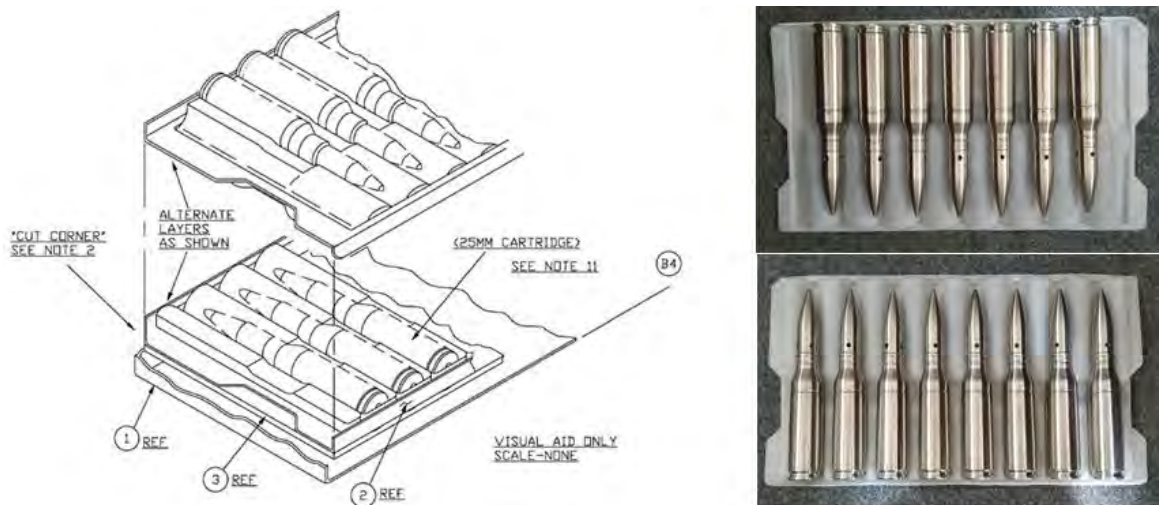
HDPE packing tray nesting (left) and 25mm round alternating tray layout (right)
